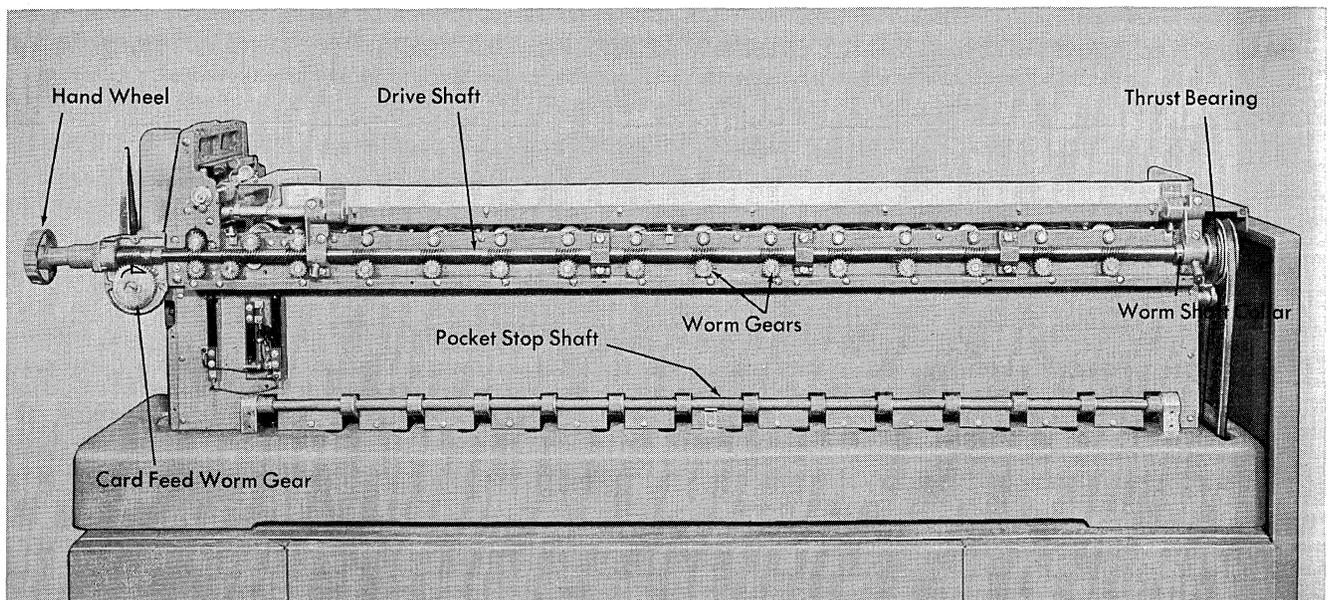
Main Drive Shaft and Pocket Stop Shaft
